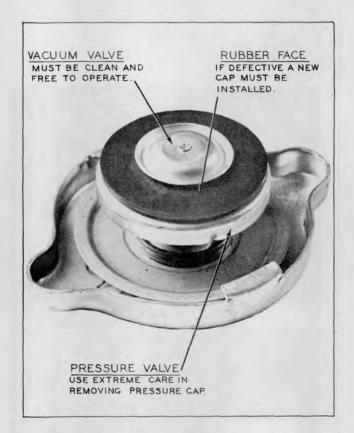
Pressure Cap Gasket, Valve and Valve Gasket
